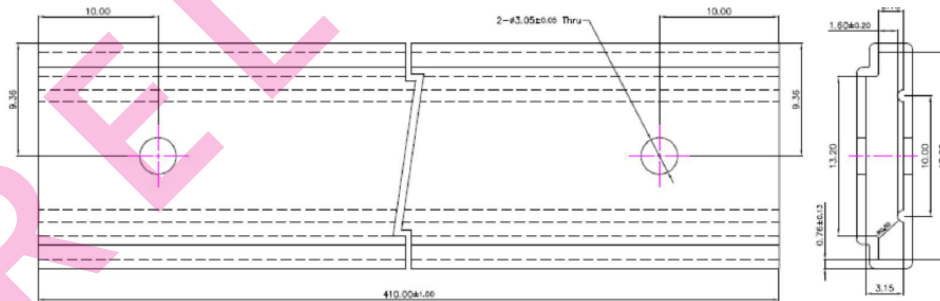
Tube dimensions for L2C5-xxxx1204E0900 and L2C5-xxxx1205E1100.
